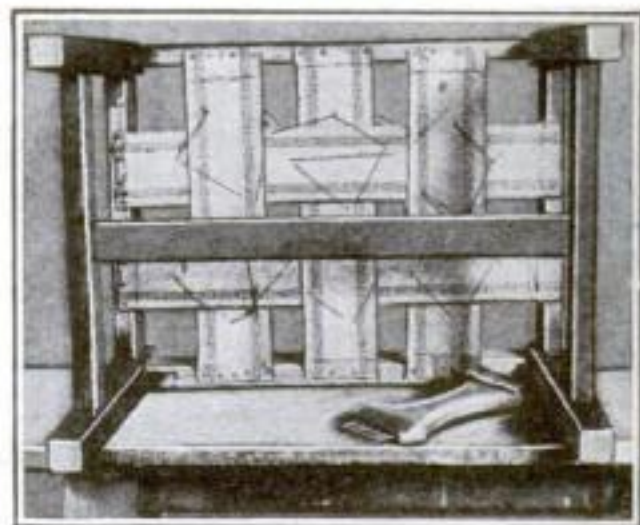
The bottom of the stool, showing the webbing and the stitches that hold the springs
